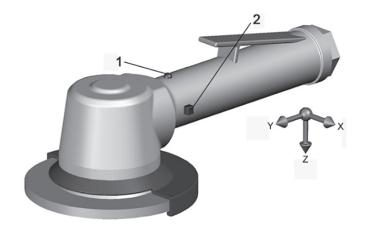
Measurement locations — Pneumatic angle grinder with separate main handle
